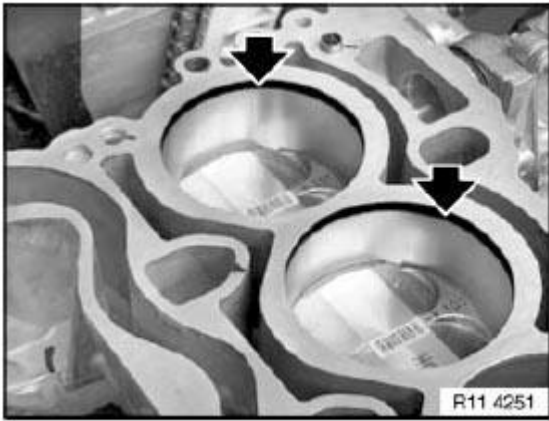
Locating Oil Carbon Residue On Cylinder Wall
